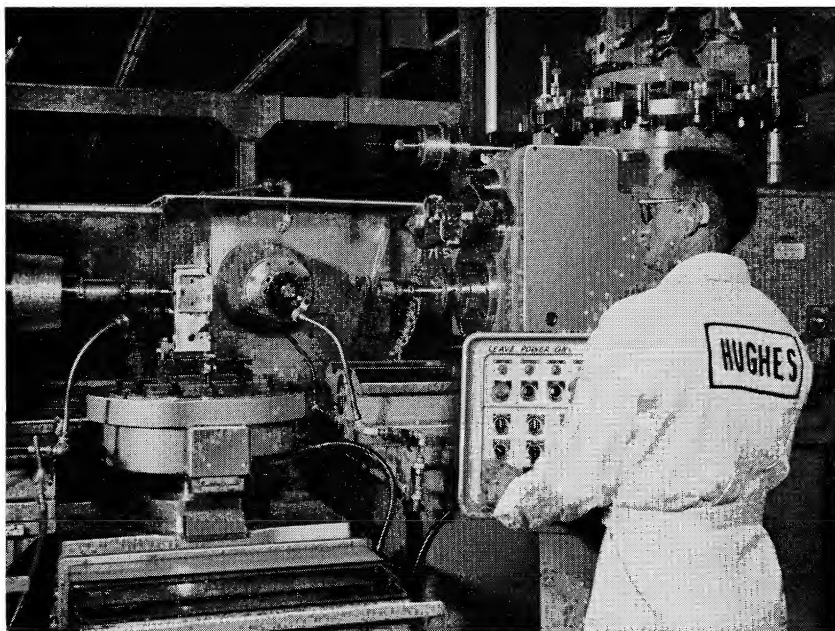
Close-up view of work area of MT-3 numerically controlled machining center. Part on rotary indexing table is being machined by tool in the universal spindle head at right. Tape program includes operations by heavy-duty milling head at rear and precision boring head at left.
